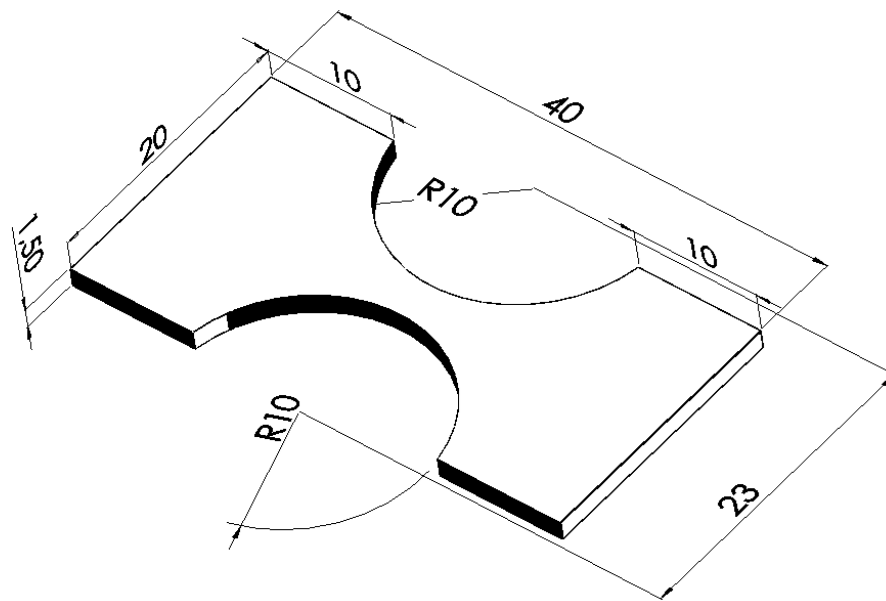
Dumbbell-shaped template used for cutting cheese samples. Dimensions are in mm.
